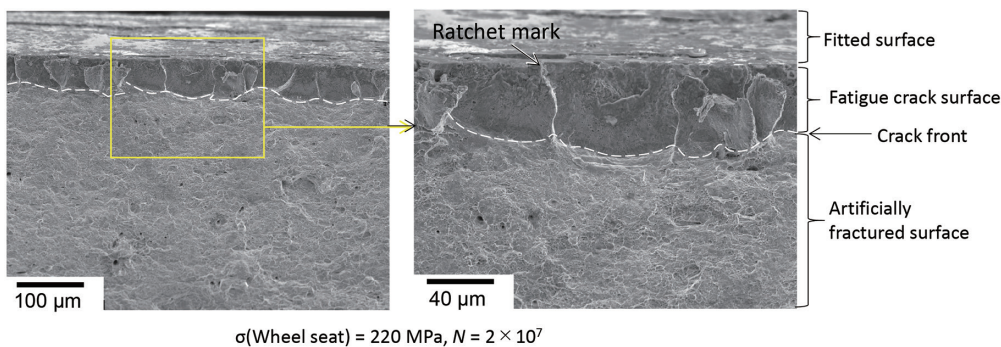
SEM images of crack surfaces with fretting fatigue cracks initiated on the fitted surface of an induction hardened axle
